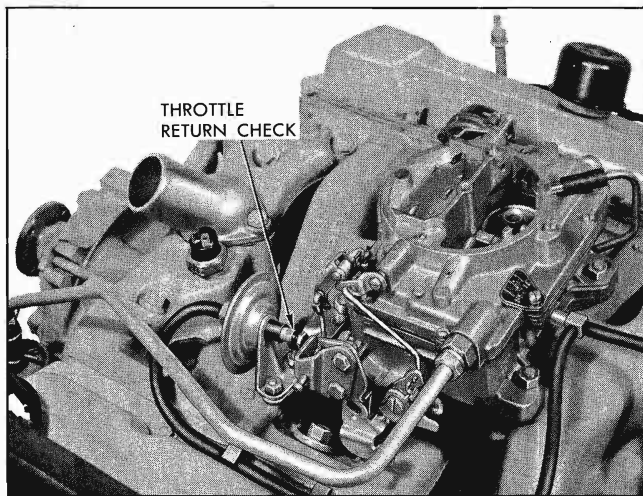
B-2 Throttle Return Check Hook-up for Roto Hydra-Matic Four Barrel Carburetor (Same Hook-up for Two Barrel)
